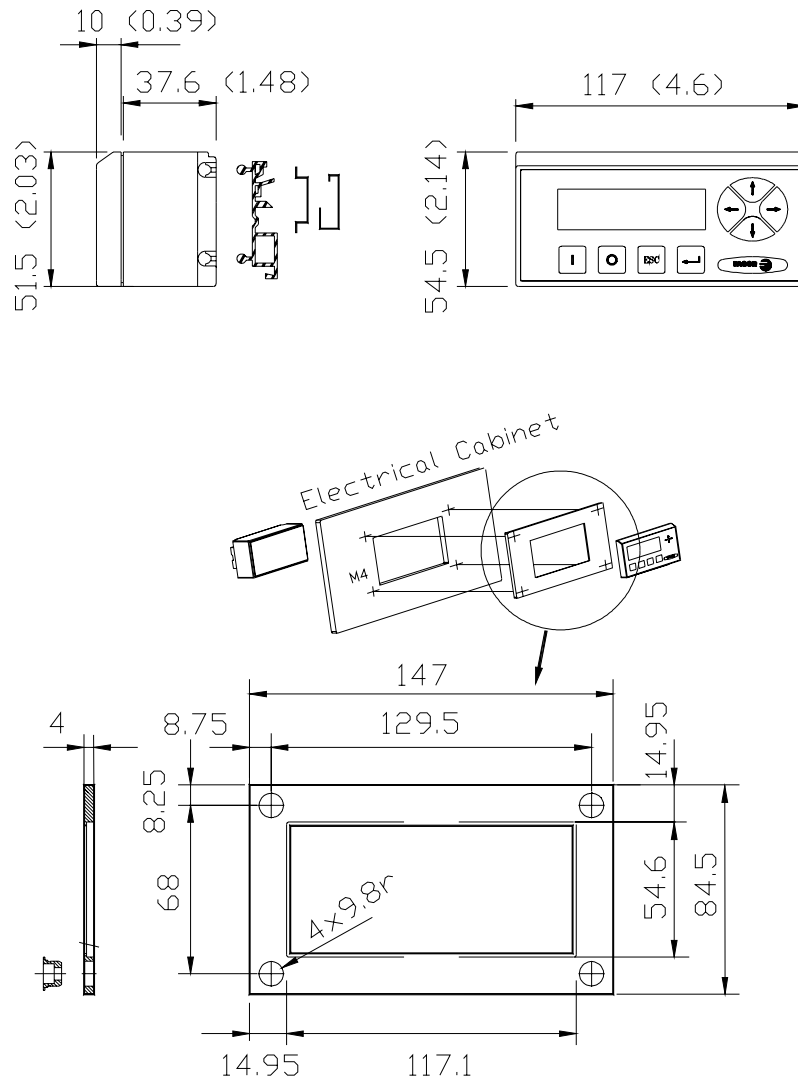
Dimensions of the "DDS PROG MODULE". Units in mm (inches).
